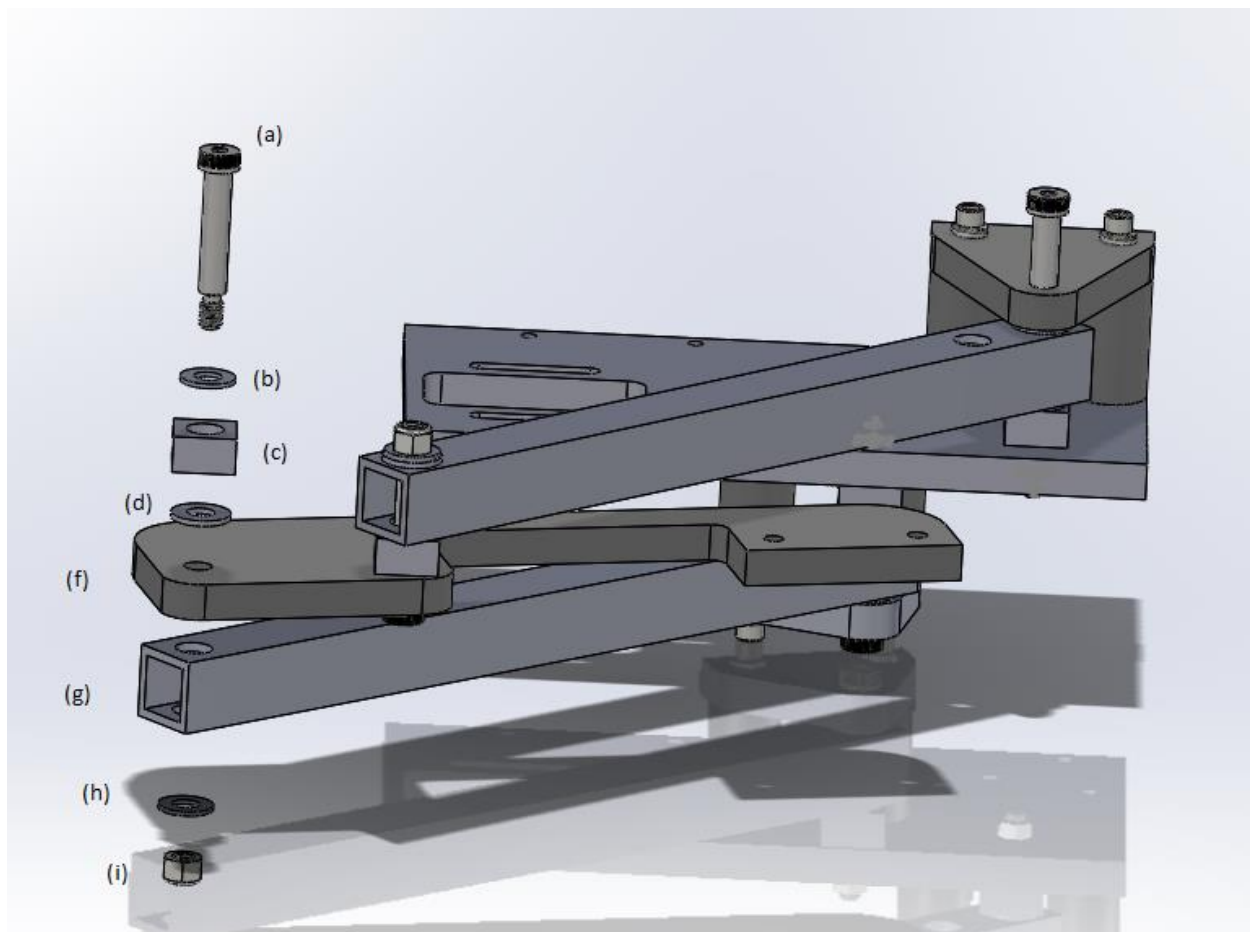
Step 7. exploded view of attaching output link to coupler
